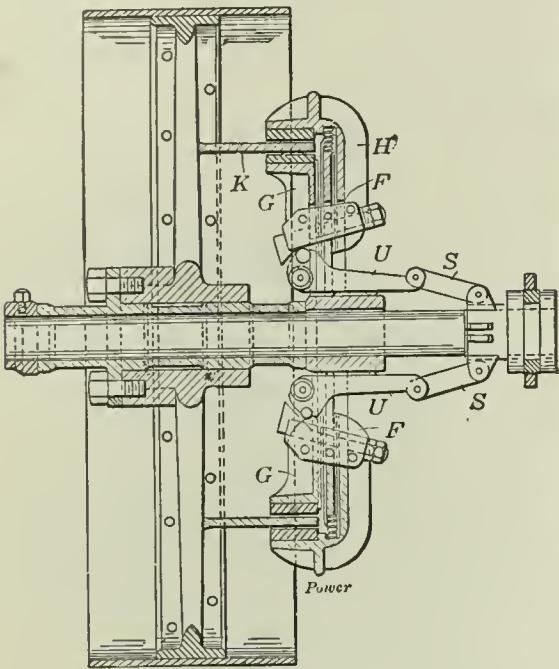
SECTIONAL VIEW OF THE FALLS FRICTION-CLUTCH PULLEY
